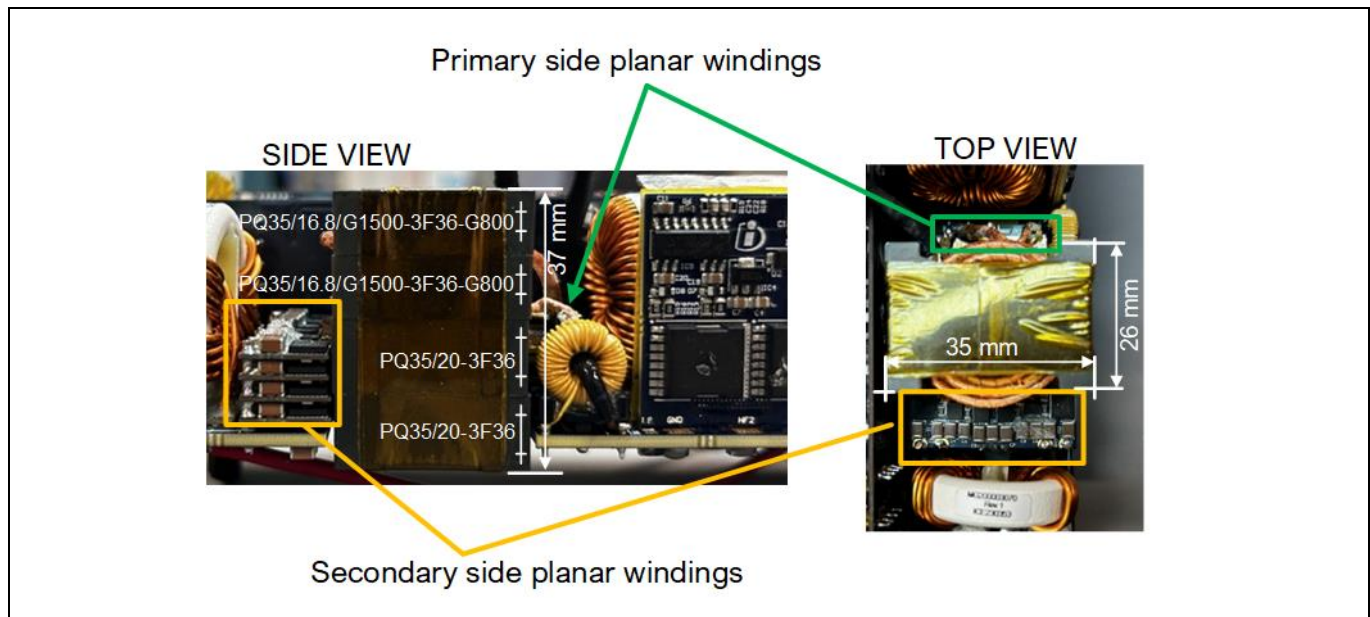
Integrated planar transformer assembly – picture of an assembled prototype
